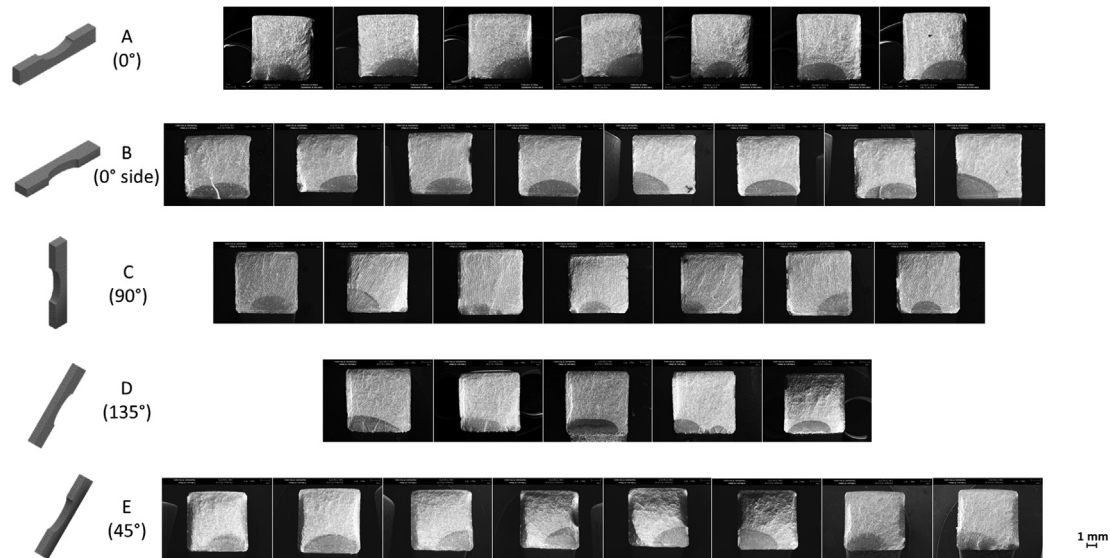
Fracture surfaces of the 3 PB specimens.
